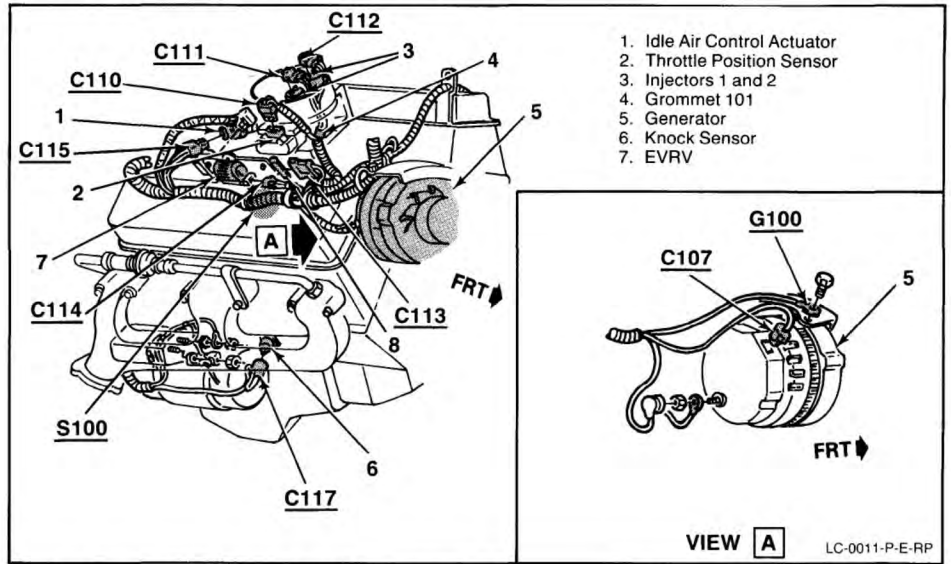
Engine Wiring Harness, RH Side (RPO L05 w/P42)
